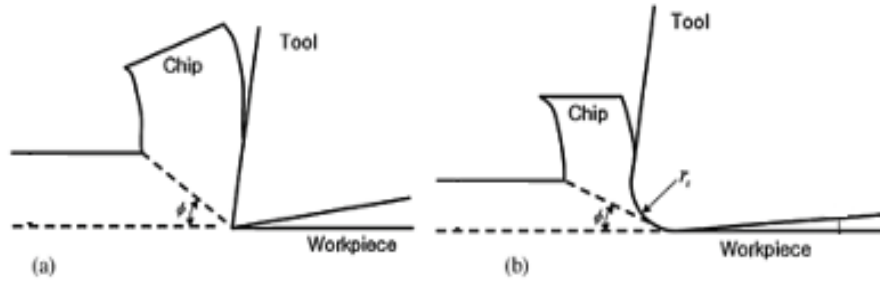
1 difference between macro and micro milling; a- macro milling, b- micro milling [2]
